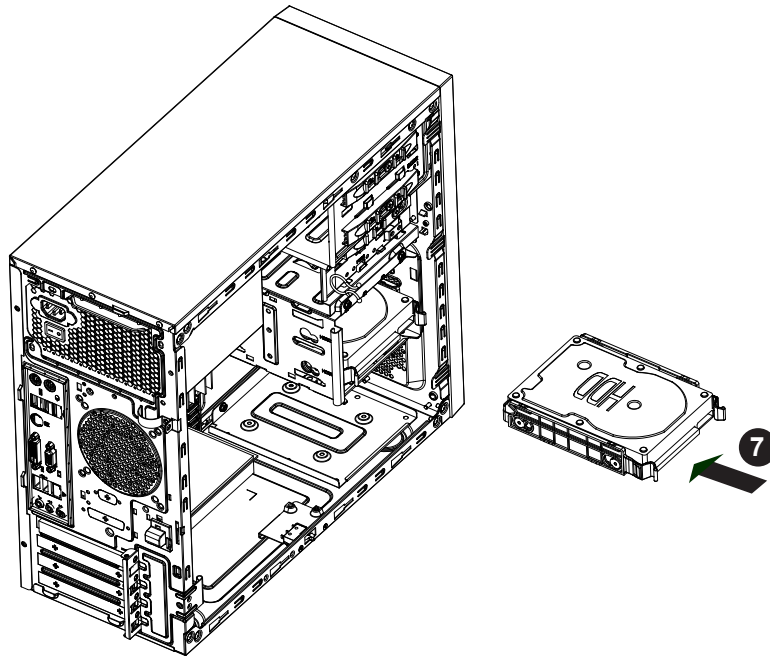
Installing the Hard Drive Carrier into the Hard Drive Bay
